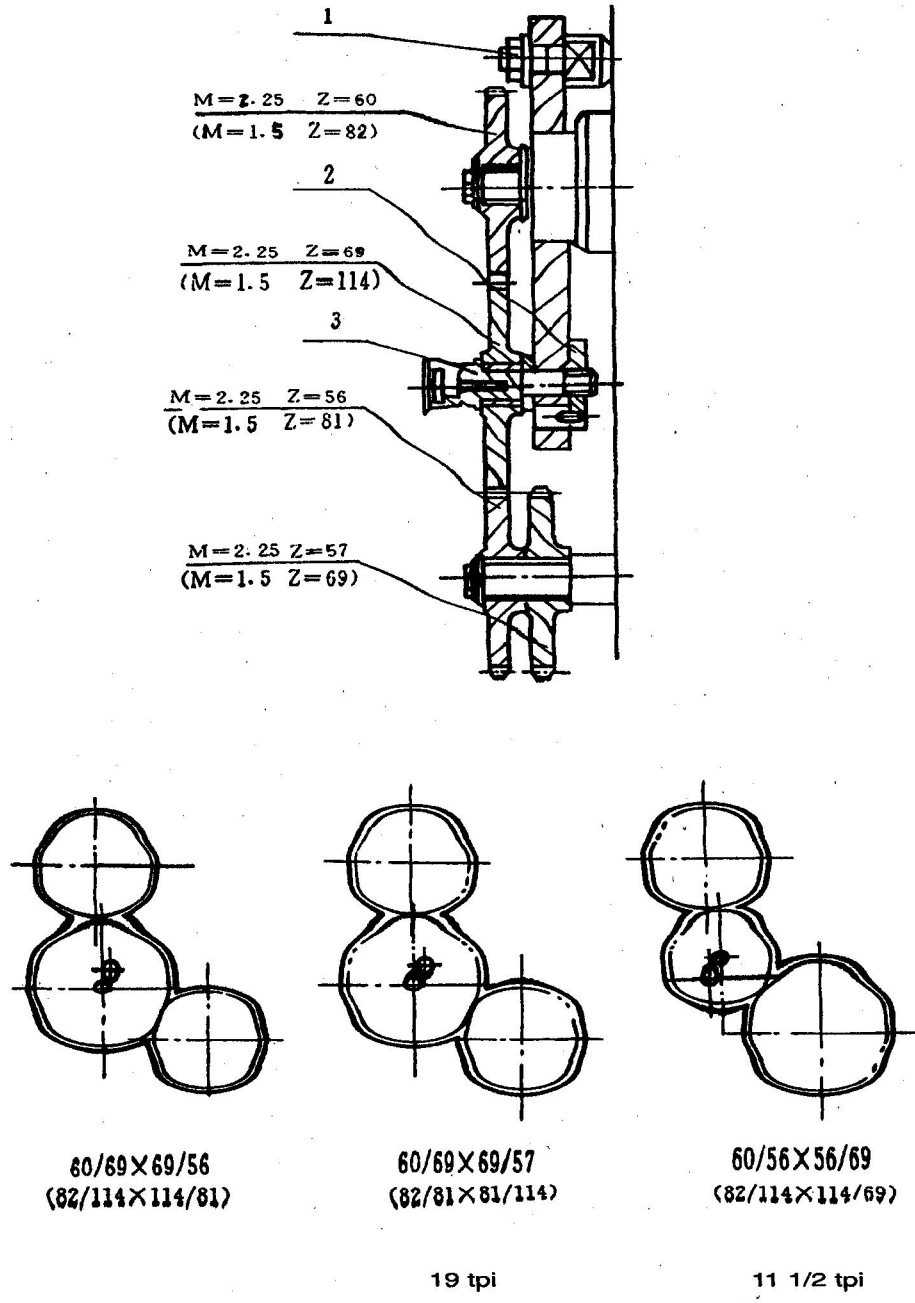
Engagement of change gears of CS6¹/₂50C
